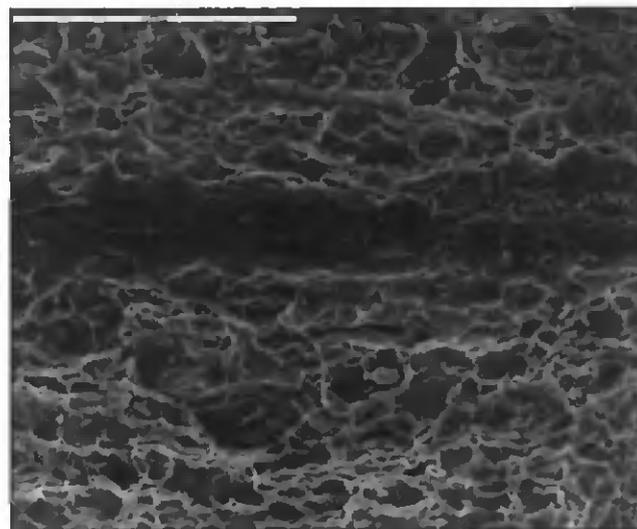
Overview of the fracture surface of a longitudinal weld in AA6082 with kissing bond showing in the center.
